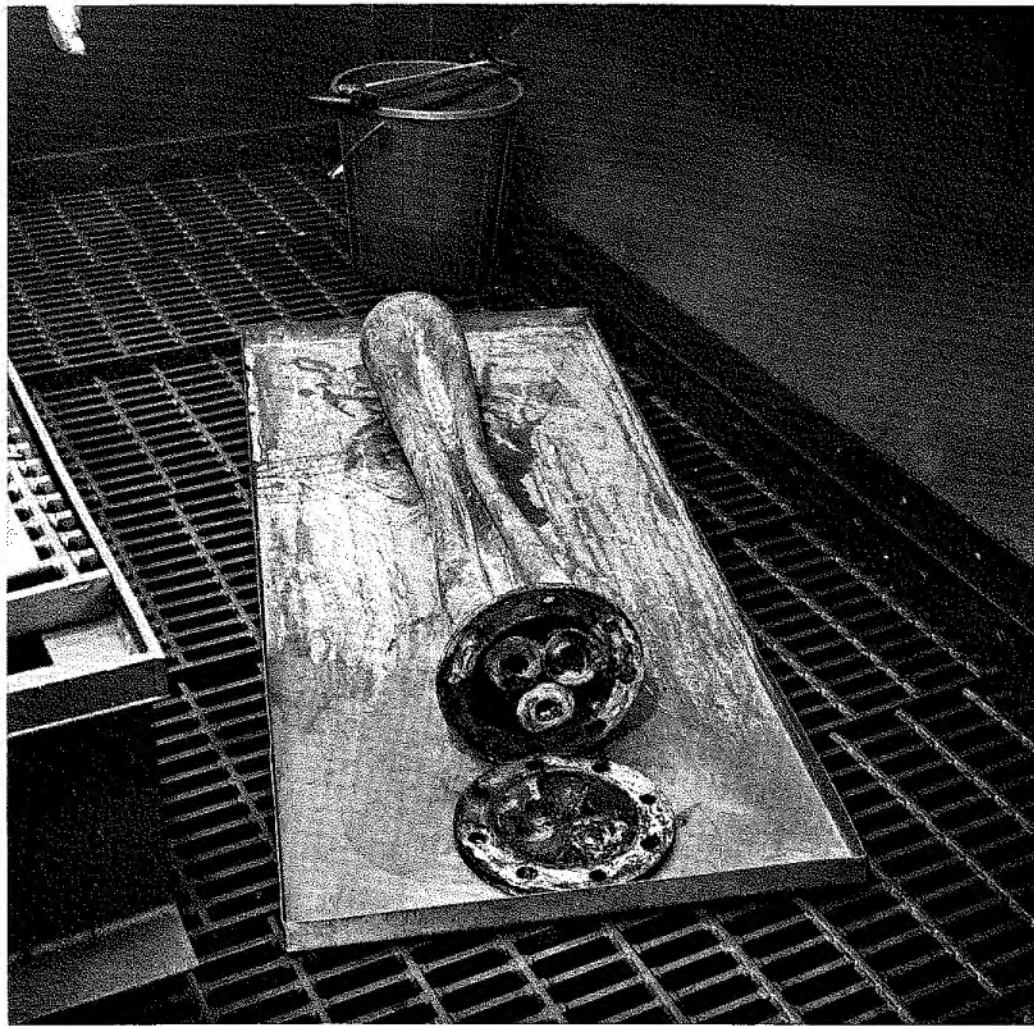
Inner Steel Vessel with the Cover Removed, Showing the Enclosed Wound Filter Assemblies.
